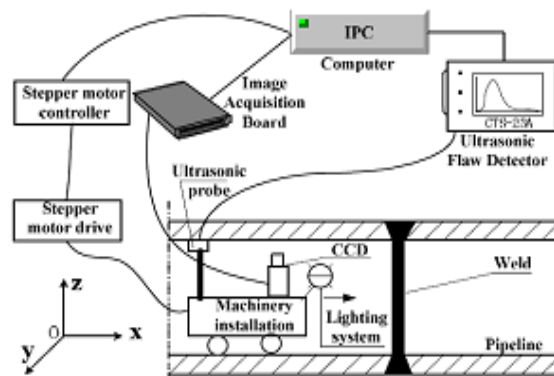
Visual Inspection System for Pipe Weld Visual Inspection
